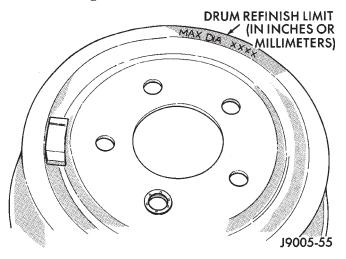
Typical Location Of Brake Drum Refinish Limit
